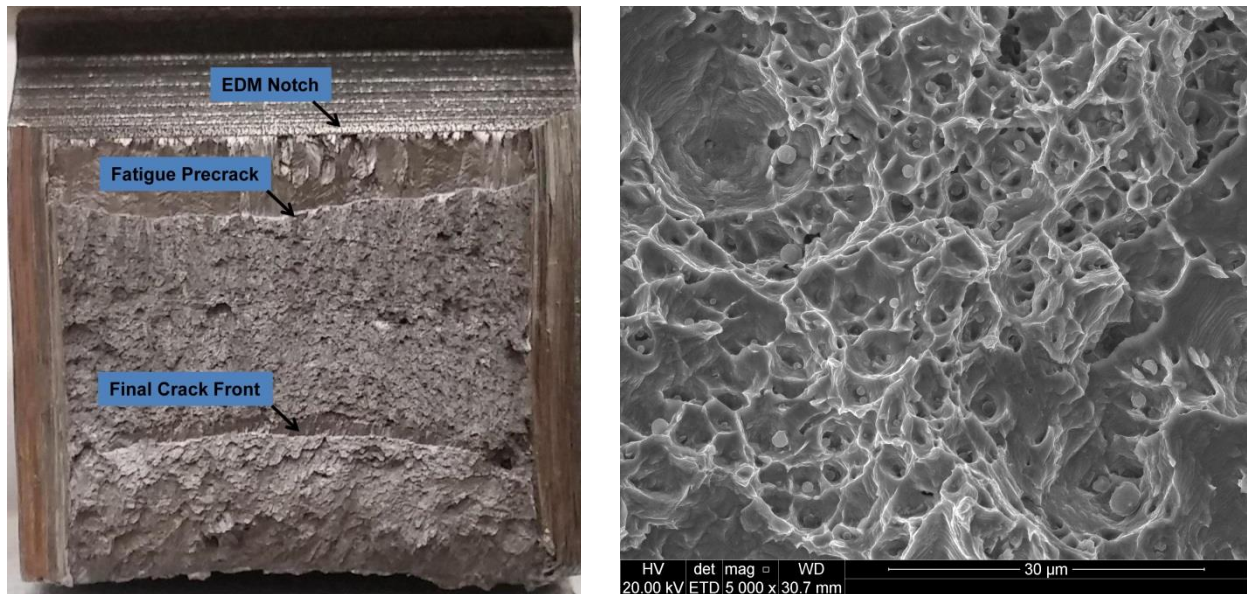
(a) Typical crack surface obtained from one of the tested SE(T) specimens; (b) SEM fractographs of the centre of fracture surface taken from girth weld.
